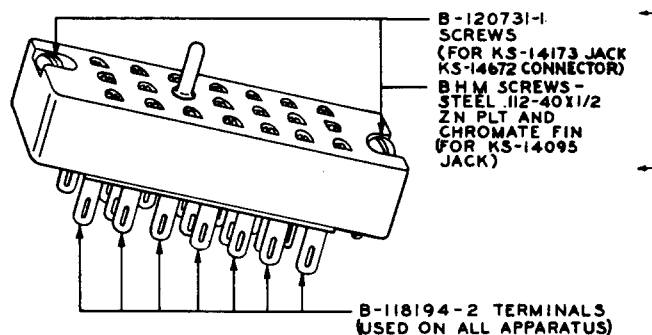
Typical Jack (KS-14173 Jack Shown)
